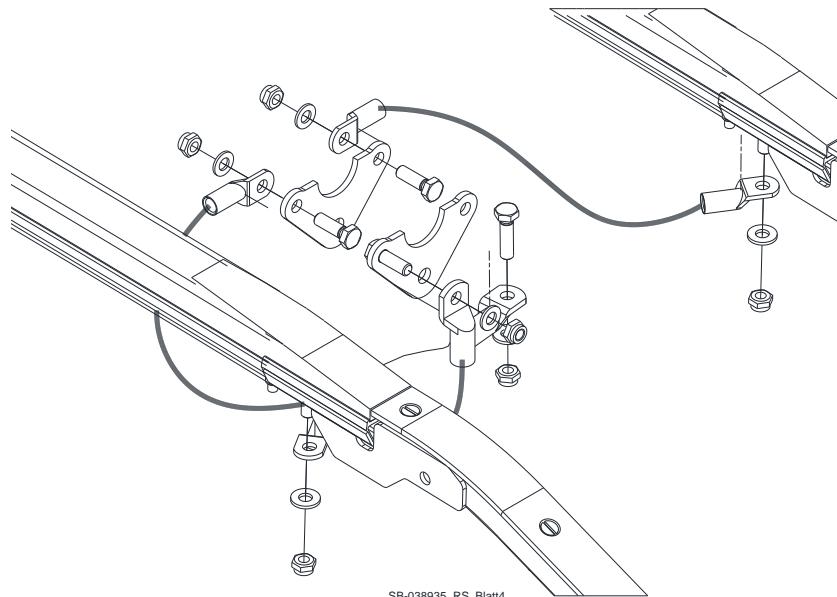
Shunts between upper frame and rocker box / sliding strip
